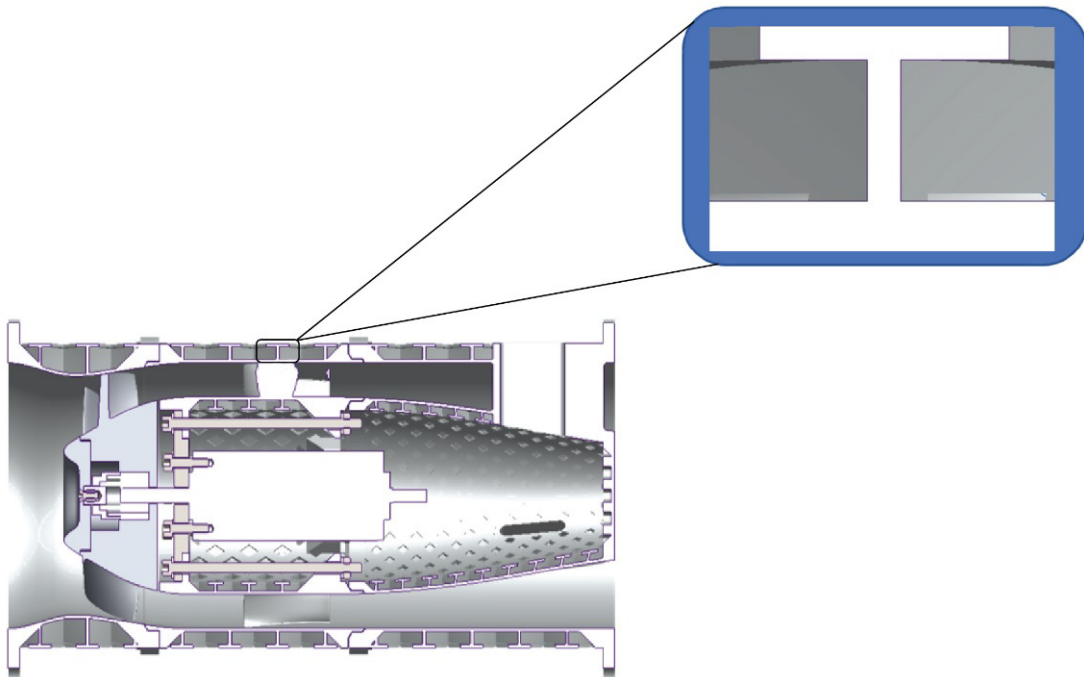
Cutaway view of metal Spacefan illustrating T-beam stiffening.
